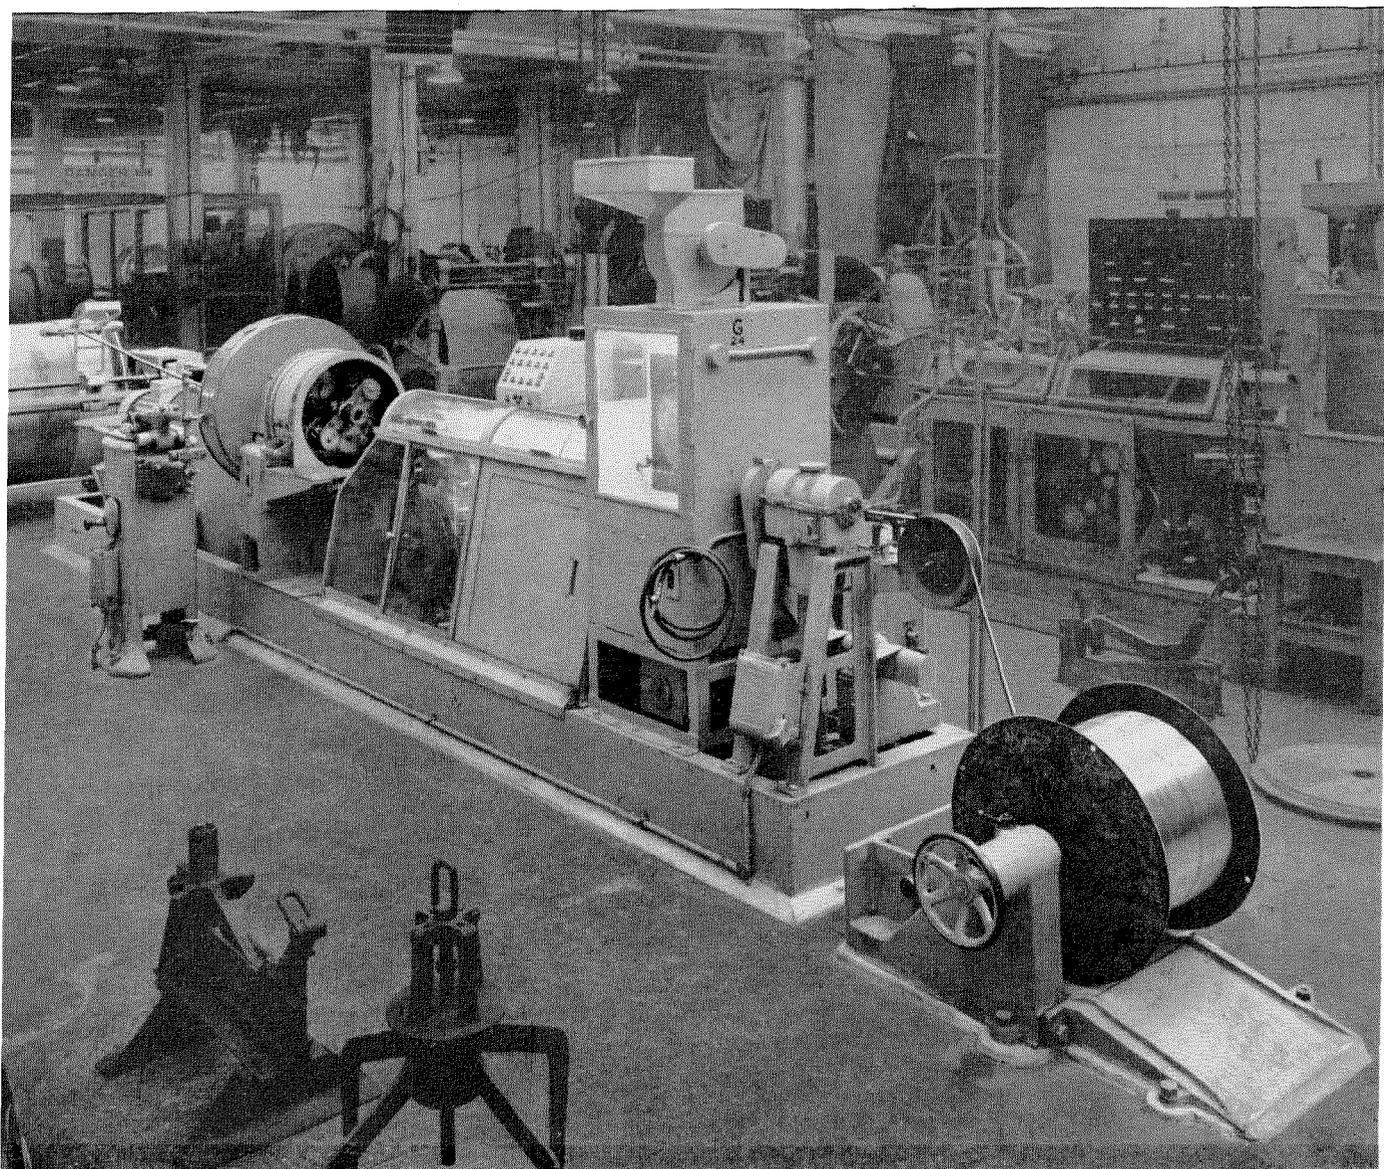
Machine for manufacturing design-6 coaxial pairs.
